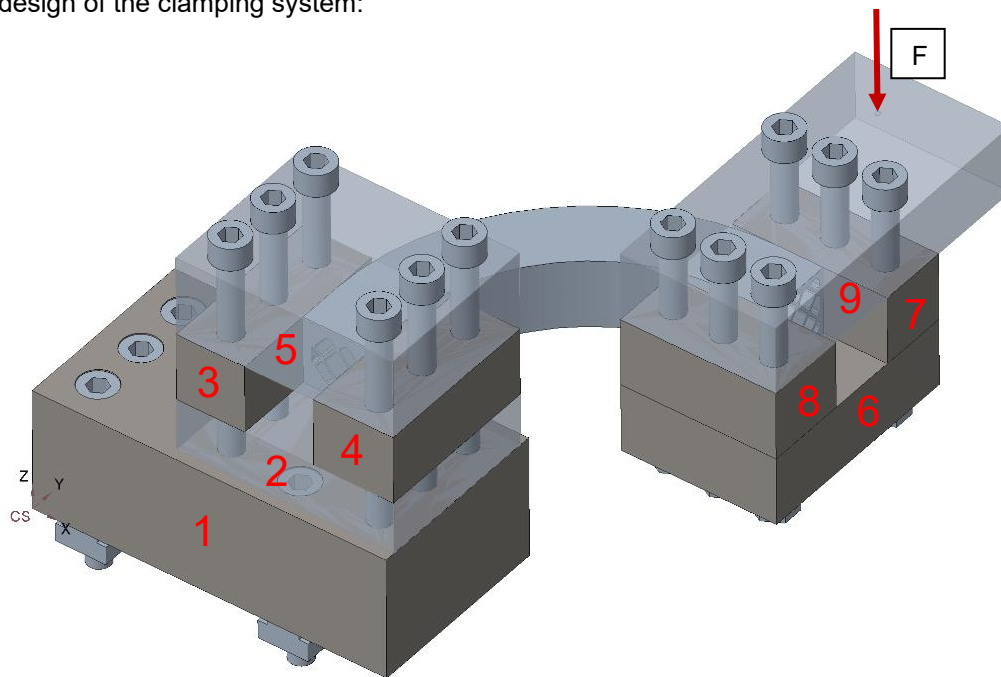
Overall view of the clamping system composed by the fix clamp assembly, the curved beam and the load clamp assembly.
